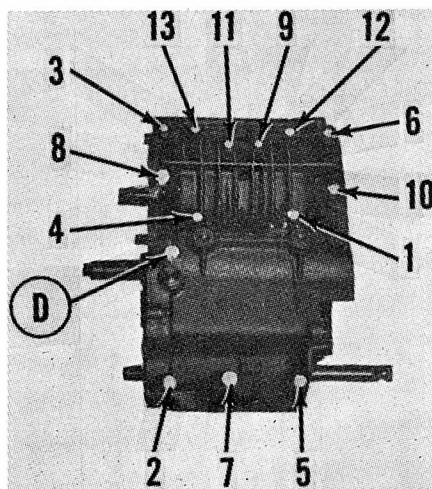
Tighten the screws in lower crankcase in the order shown. Screw sizes are listed below. Shift drum guide plug is shown at (D).
